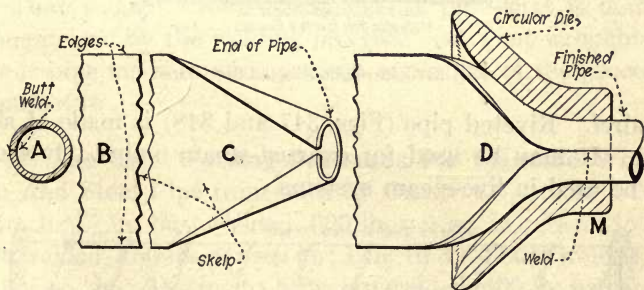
Method Of Forming Butt-Welded Pipe.
